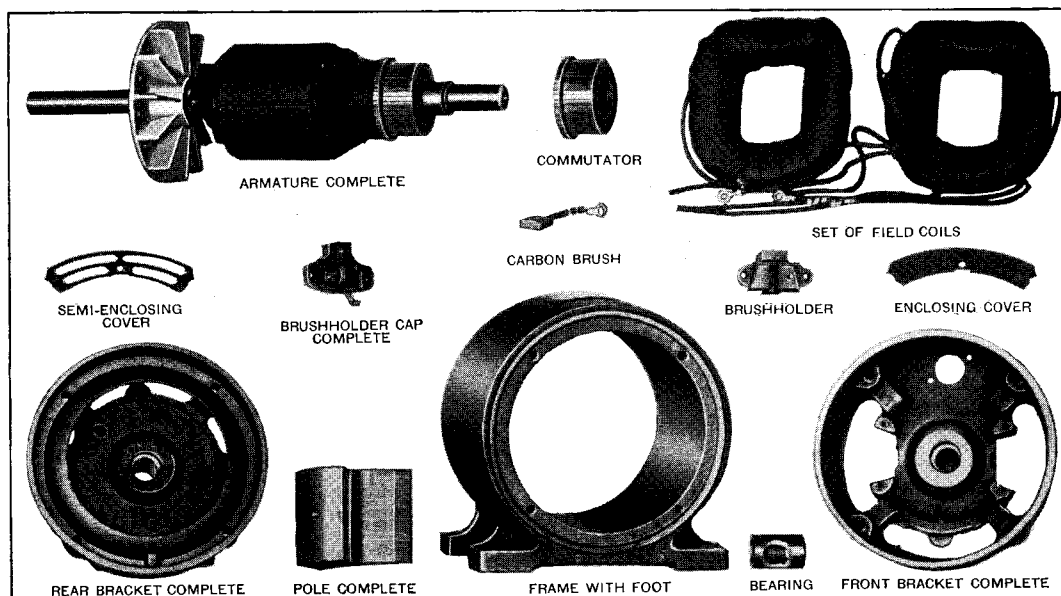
RENEWAL PARTS FOR TYPE SKL MACHINES FRAME 6
